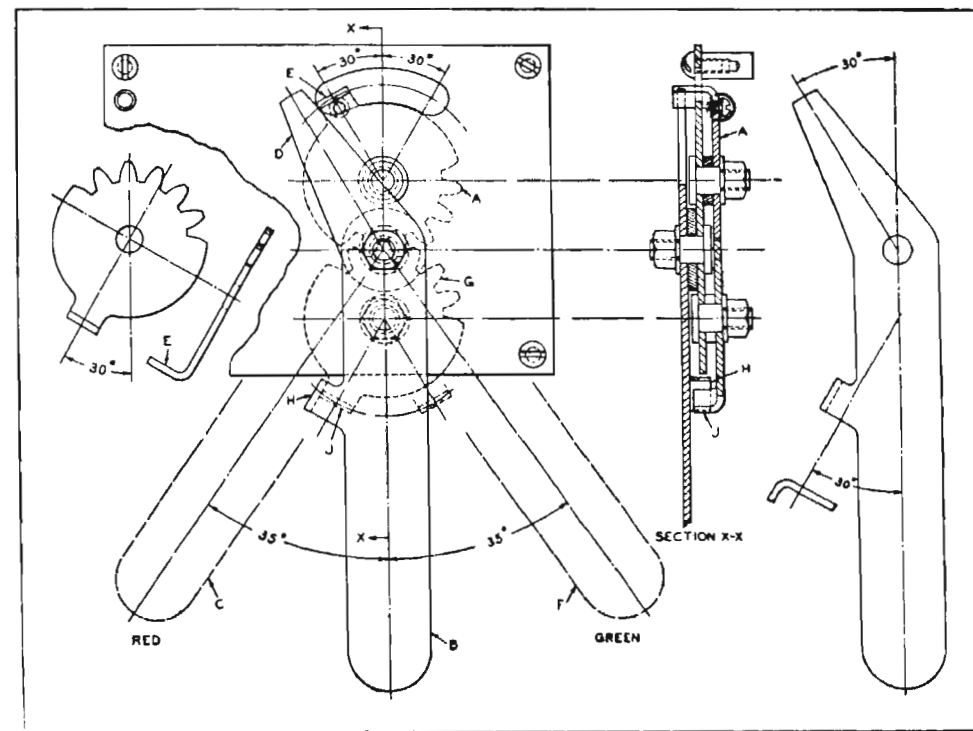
Mechanism for Rotating Segment Gear in One Direction Regardless of the Direction in which the Operating Lever is Moved.
